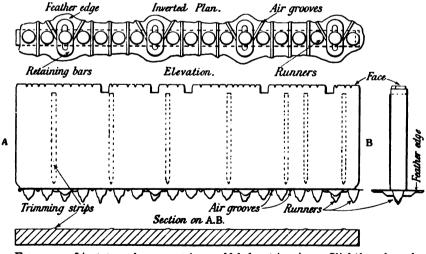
Linotype ; slug as cast in mould before trimming. Slightly enlarged.
